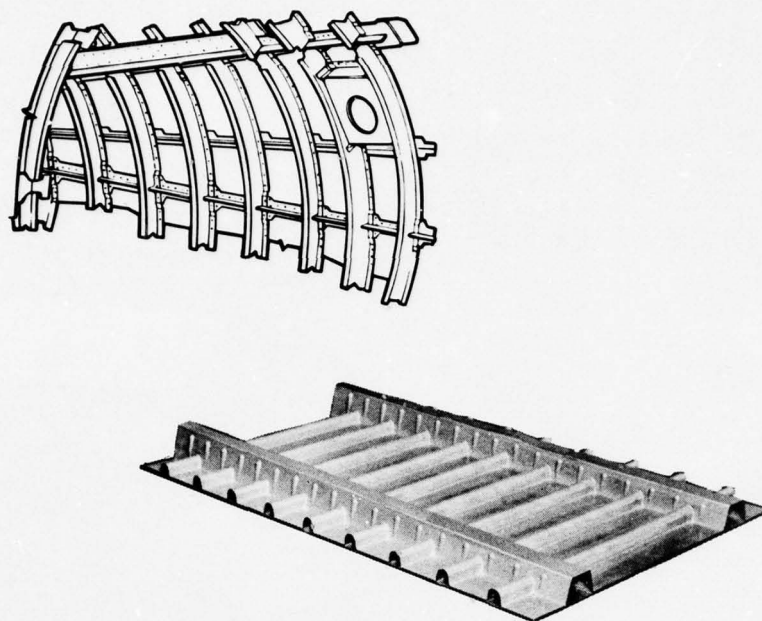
Skin/Frame/Stringer Monolithic Structure, Design, and Fabrication
